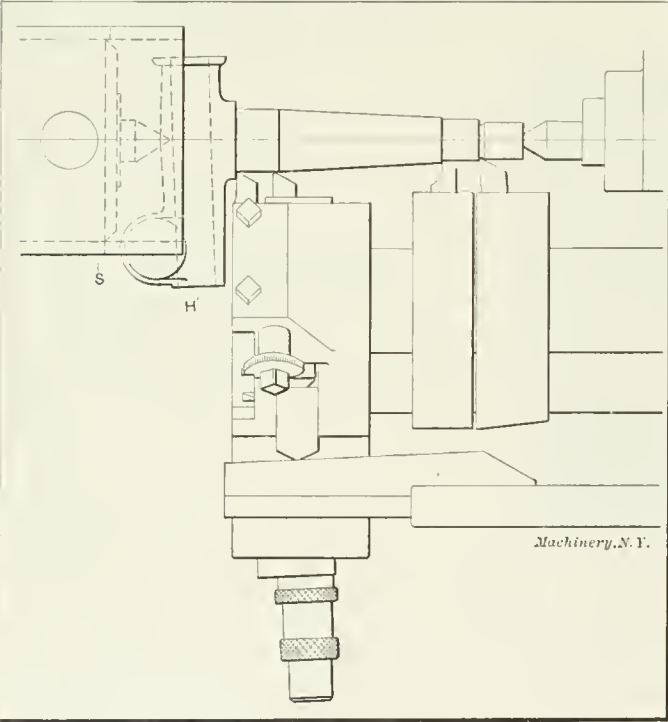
Plan View showing Method of Driving Steering Knuckle, and Tooling
